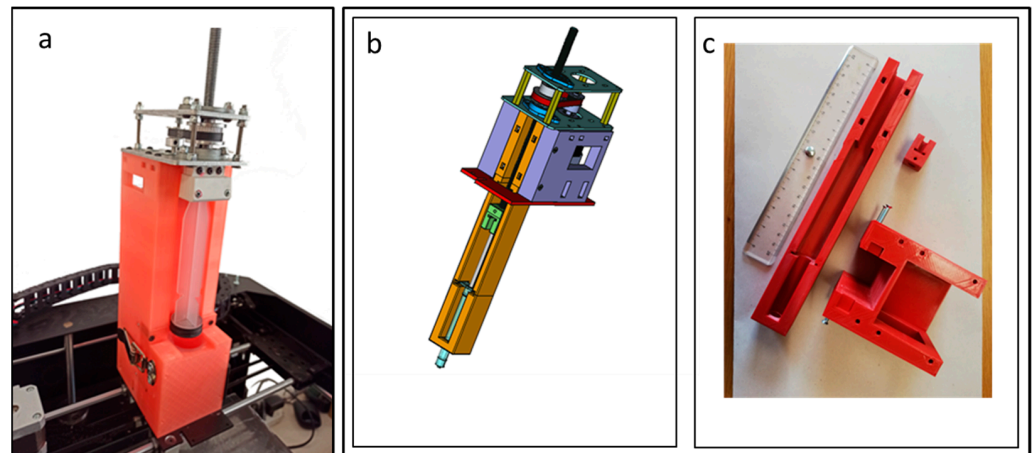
(a) Original Kentstrapper Verve 3D printer syringe adapter. (b) Isometric view of the 1 mL syringe adapter designed by FreeCAD; (c) 3D printed parts of the 1 mL syringe adapter.
